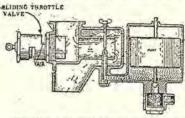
The sliding throttle valve consists of a cylindertype of throttle, but instead of being rotated, it is moved in or out of its passage, which controls the amount of gas passing to the intake manifold. As it is moved out, additional air is admitted through port holes. This type was the type formerly used with a governor.
